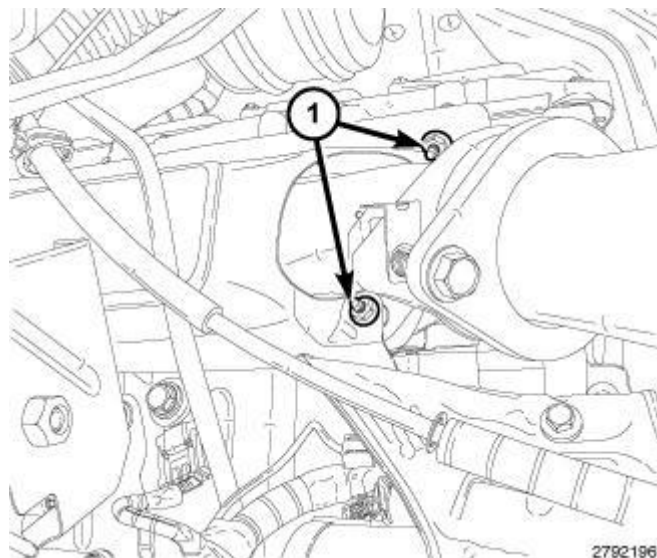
Intermediate Steering Shaft Support Bracket
